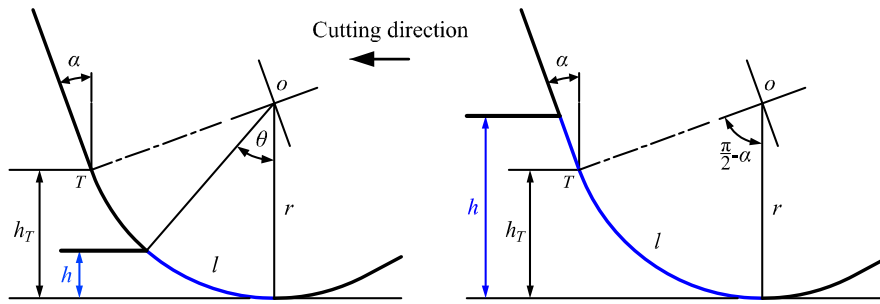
Schematic model of the contact geometry between cutting tool and workpiece (view from the direction parallel to cutting direction).
